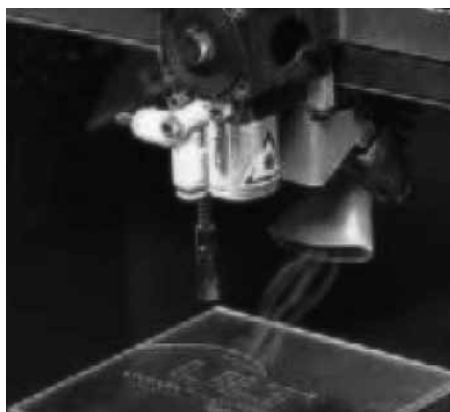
Laser welding head with exhausting inlet [13].
